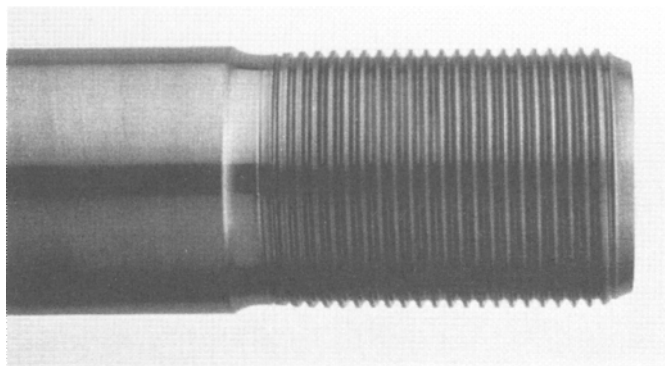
Piston rods. Precision-manufactured rolled threads and induction hardening provide high fatigue strength and long life in heavy duty service. Standard rod material is AISI 4142 carbon steel; other materials are available as required. Tungsten carbide coatings are also available for maximum surface hardness. Pistons are locked securely onto the rods. For higher pressure, smaller bore cylinders, the piston may be integral with the rod. (Used by permission: Bul. 85084, ©1992. Dresser-Rand Company.)
